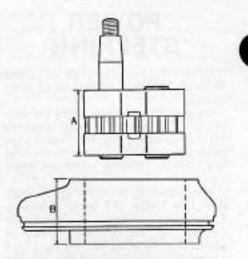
Width (A) of rotors and bearings essembly must be not more than 9.2032 mm (0.008 inch) narrower than width (B) of pump body.
